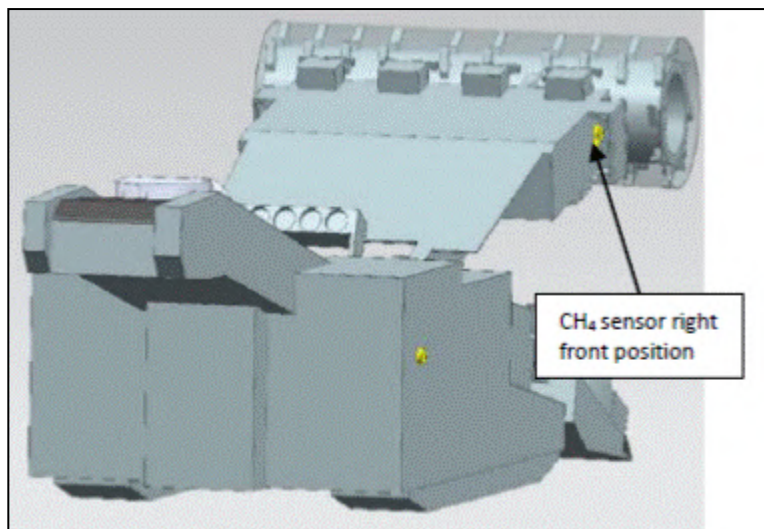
Right-rear view, Cutter Head UP, Methane Sensor Positions
